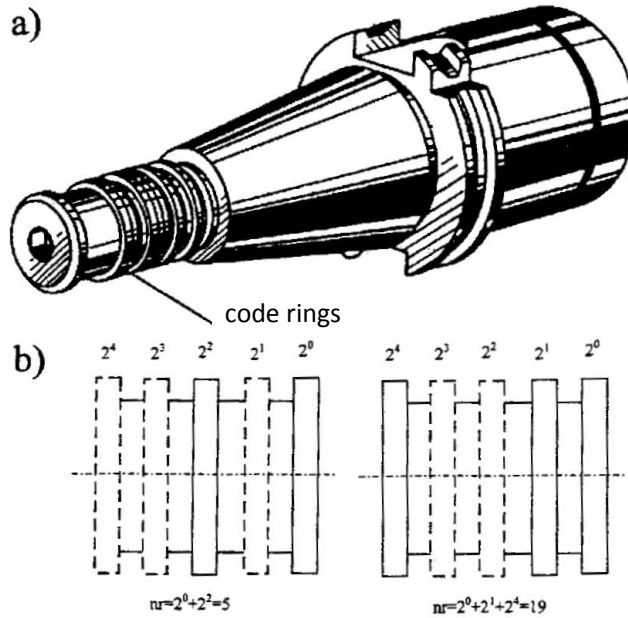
Mechanical (ring-type) tool coding: a) positioning of rings, b) examples of tool number coding
